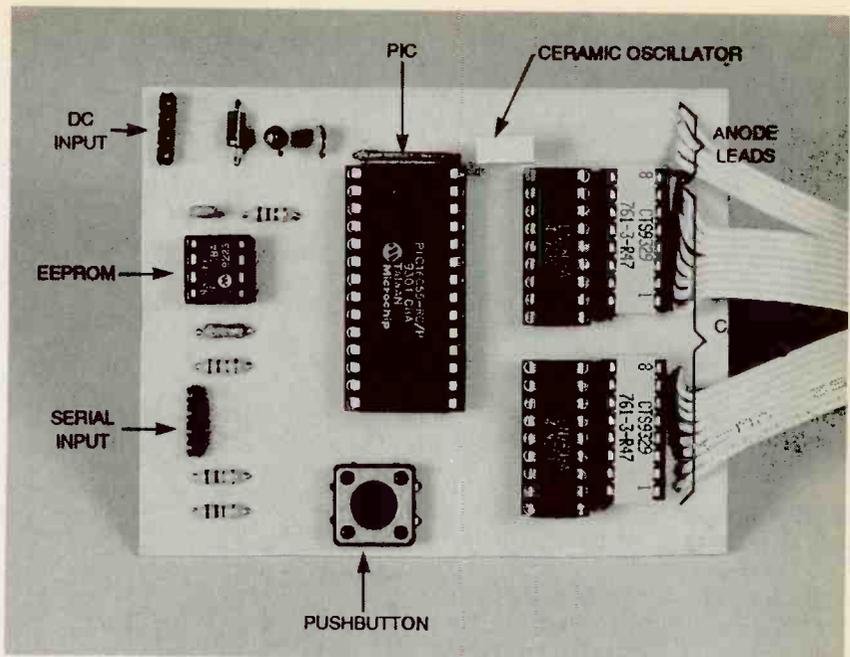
COMPLETED PC BOARD. The board can be installed in a case of left as-is.
